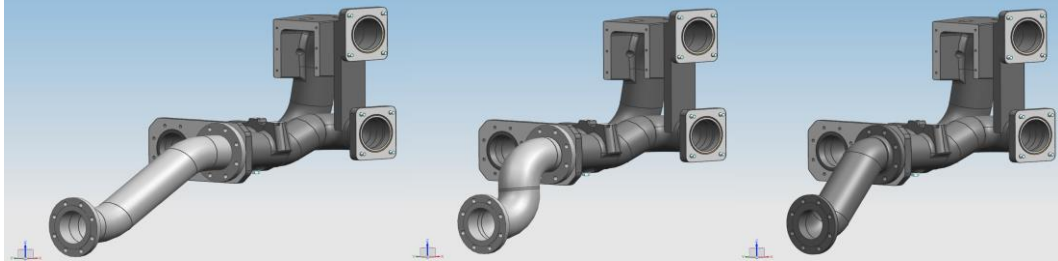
LT Water Inlet and casted cooling water pipes. (Old, Weld & Cast.)
